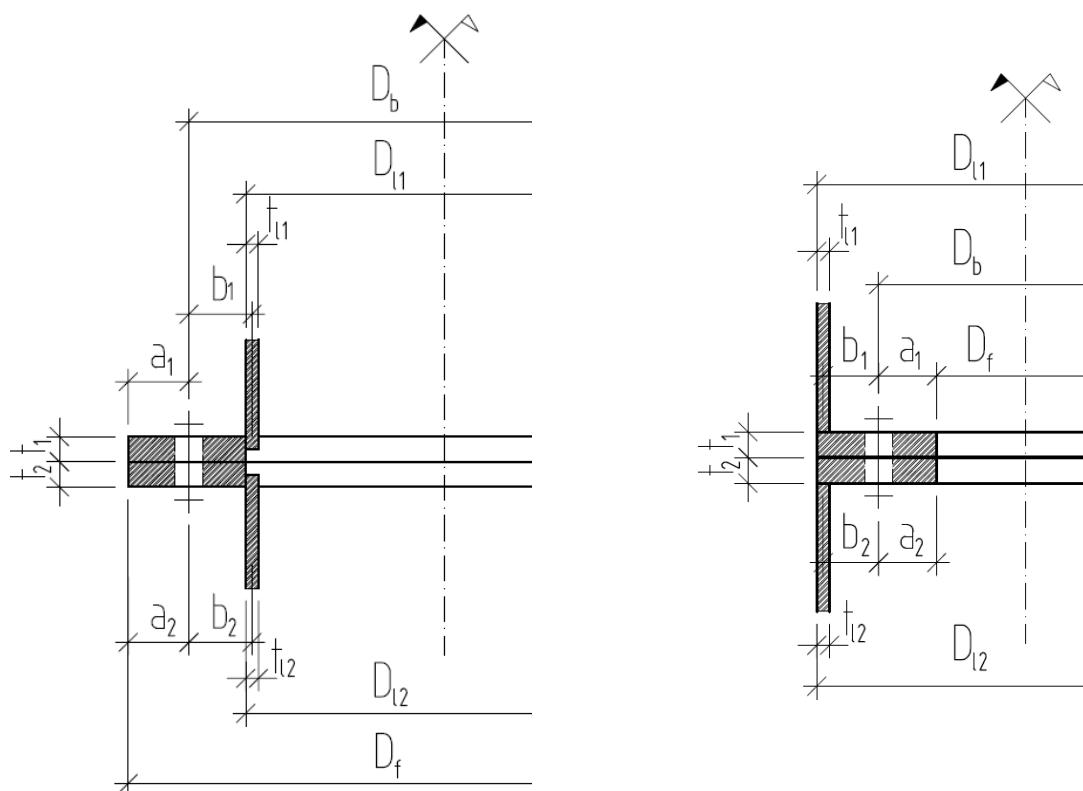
Scheme of outside (left) and inside (right) flange of tube
